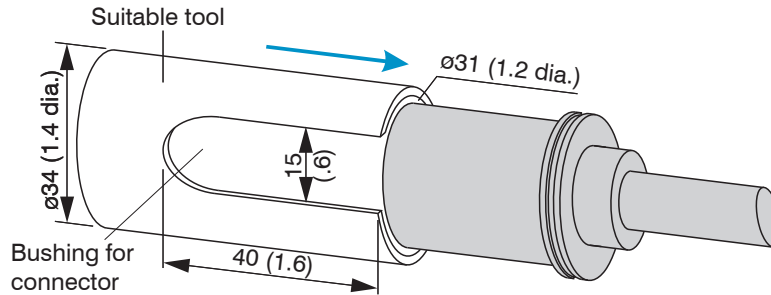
Mounting of an induSENSOR, EDS- ... -S model
